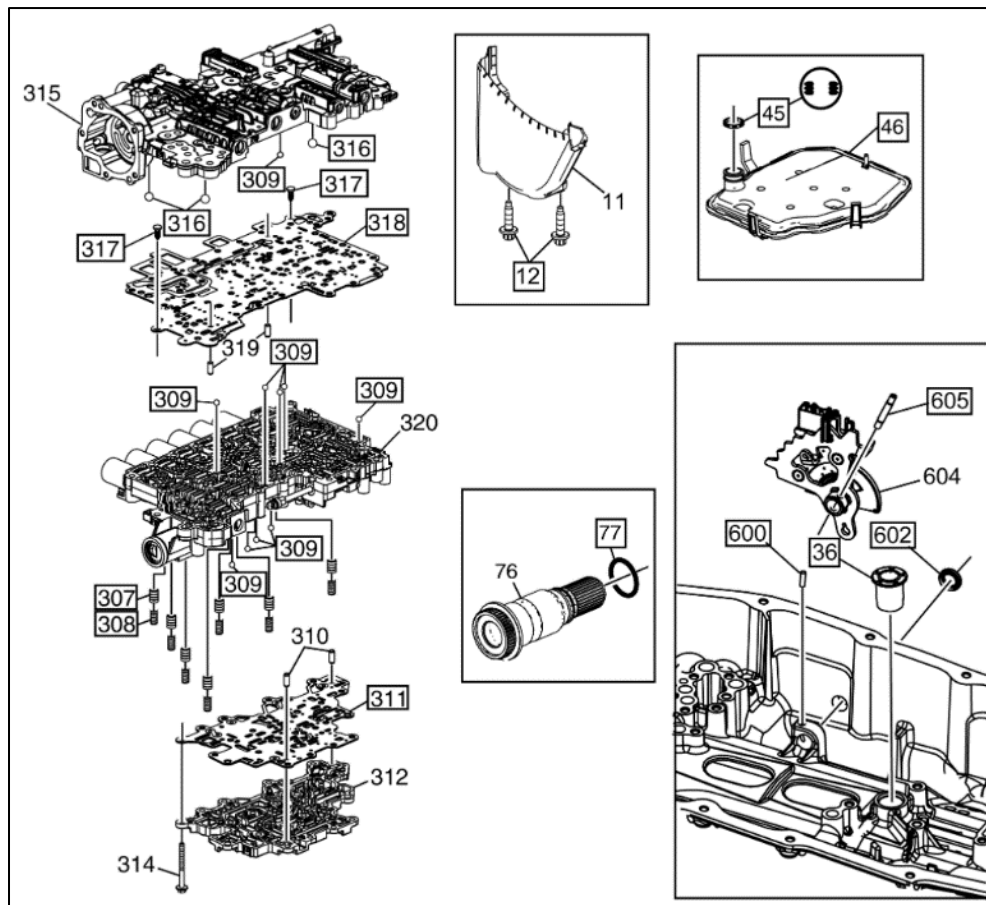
Exploded View of the Valve Body Components.¹²⁶
